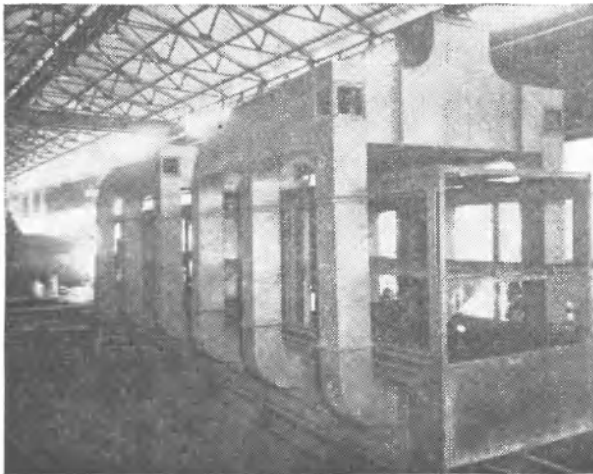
Welded framework for a furnace. An example of good design and effective use of welding.
